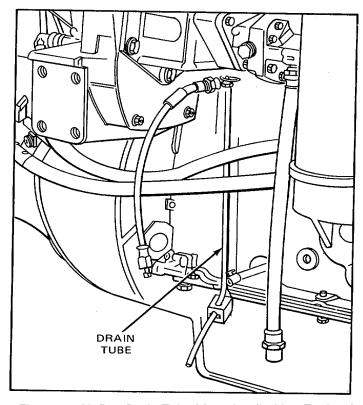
Air Box Drain Tube Mounting (In-Line Engines)
